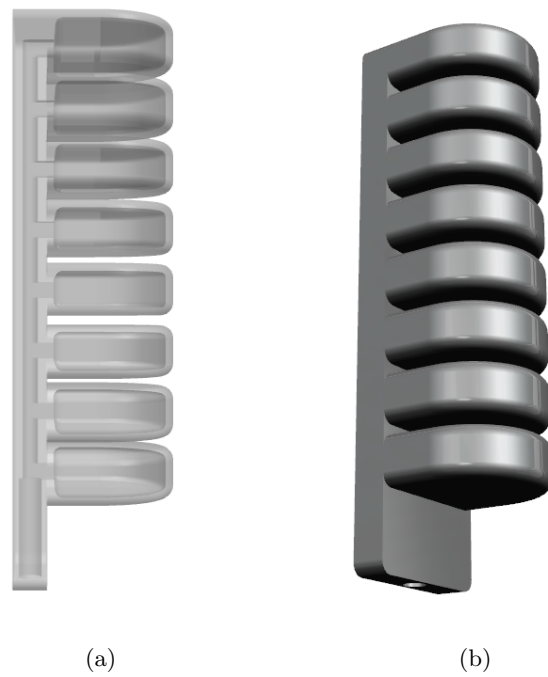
The a) transparent and b) opaque view of the initial prototype design of the single balloon gripper.
